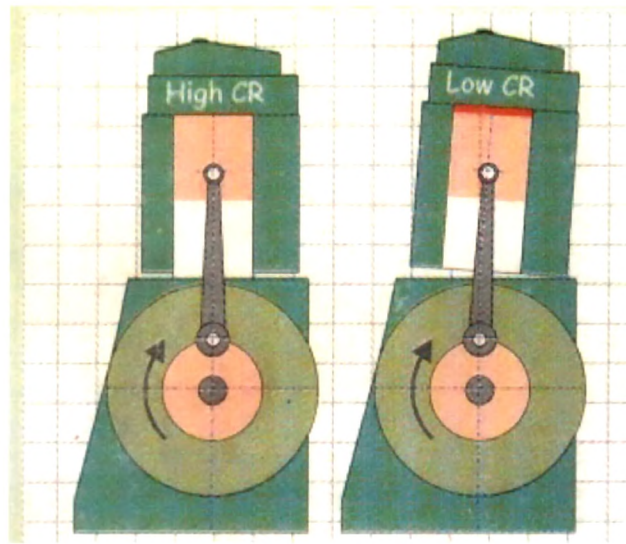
Principle of Tilting Cylinder Block Assembly
